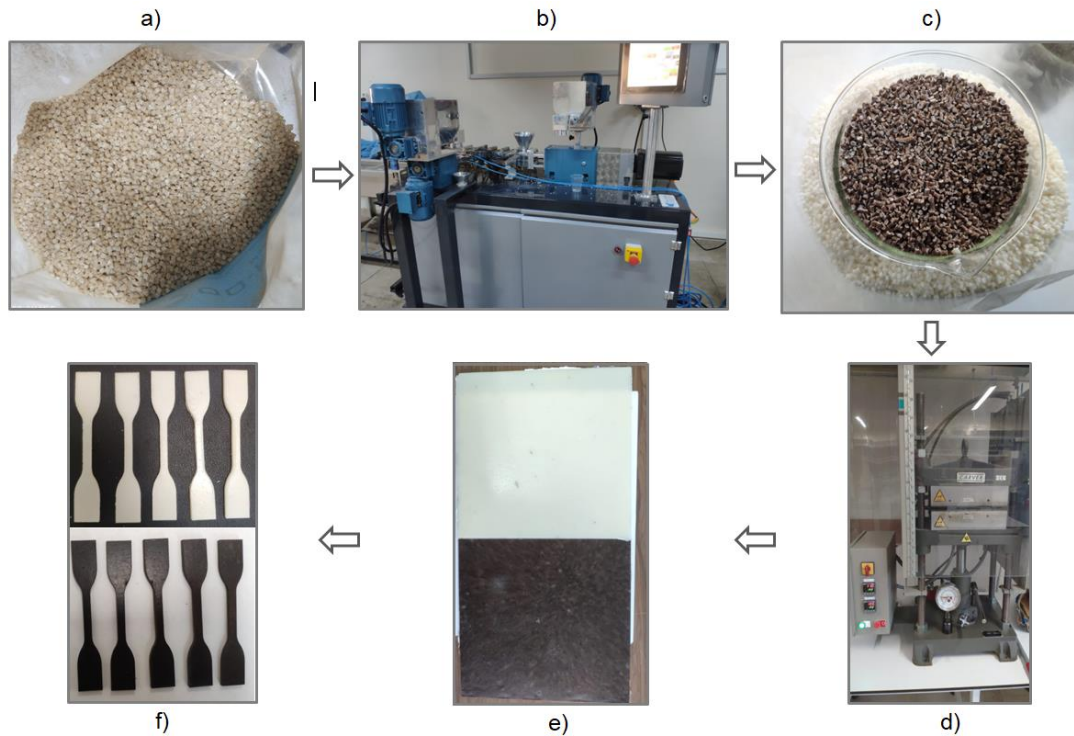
The preparation of WPCs; a) mixture of composite, b) Polmak Plastic Twin Screw Extruder Machine, c) crushed materials and pure ABS granules d) Carver hot press machine, e) WPC panel and pure ABS panel (200 mm x 200 mm x 3 mm), f) test specimens.
